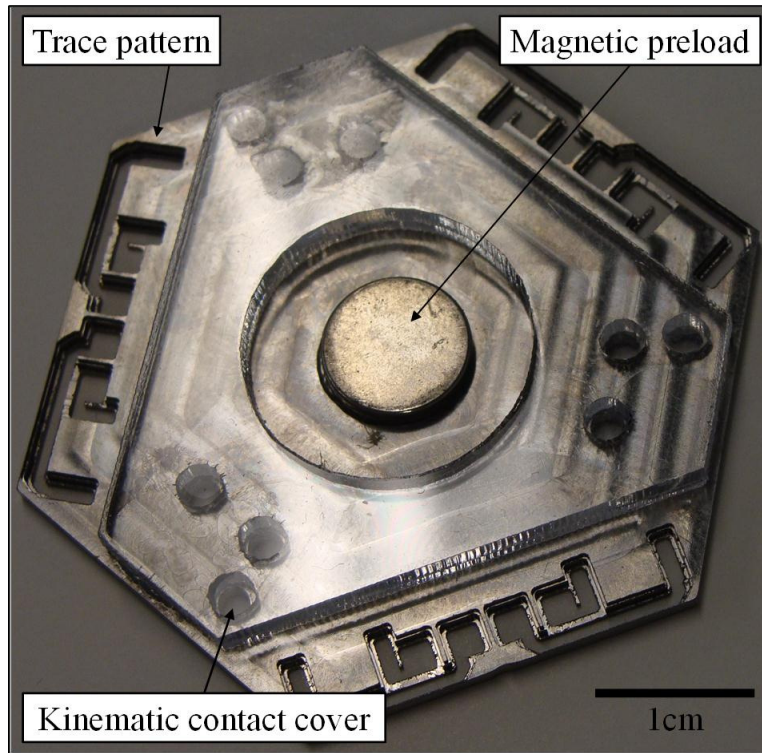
Mechanical shadowmask, used to pattern trace deposition onto the mechanical structure. The shadowmask was fabricated via micromilling, while the plastic kinematic contact cover was fabricated with laser cutting. A magnetic preload is used to ensure that the shadowmask is pressed against the surface of the Hexflex during deposition.
